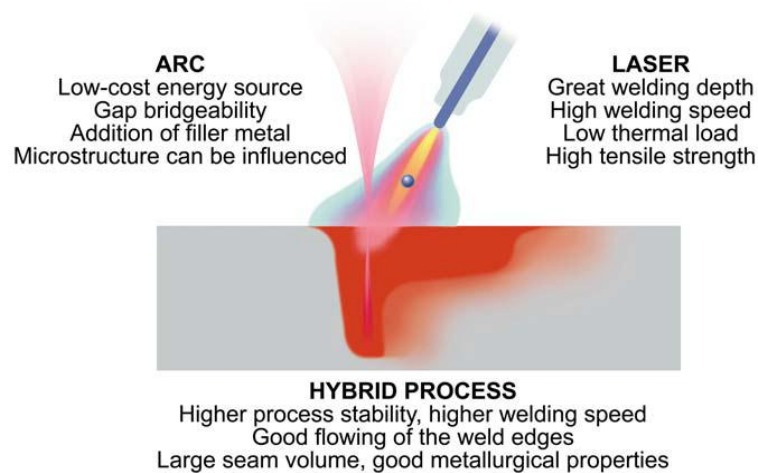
Schematic representation: Advantages of LaserHybrid welding [32].
